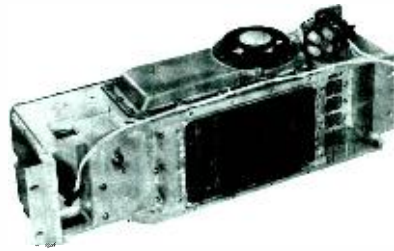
Data acquisition assembly with cover removed showing modules placement.
